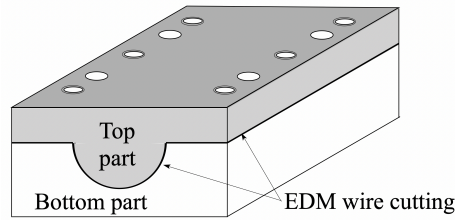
Schematic view of a width-bending test sample holder to apply a bending to a REBCO tape in the width direction, made of stainless steel.
